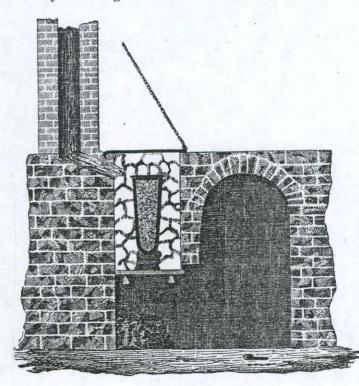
A cast steel air furnace showing the crucible in place in its compartment (left, center) under the door (Overman 1850:476).
